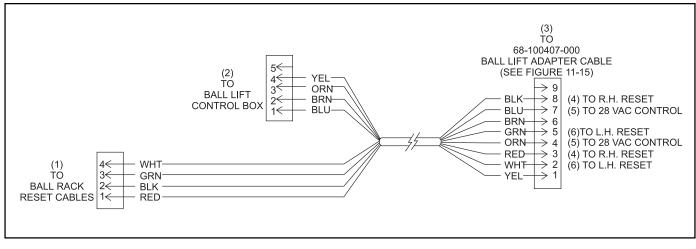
Ball Rack Lane Cable Assembly (Part No. 53-520588-000)
